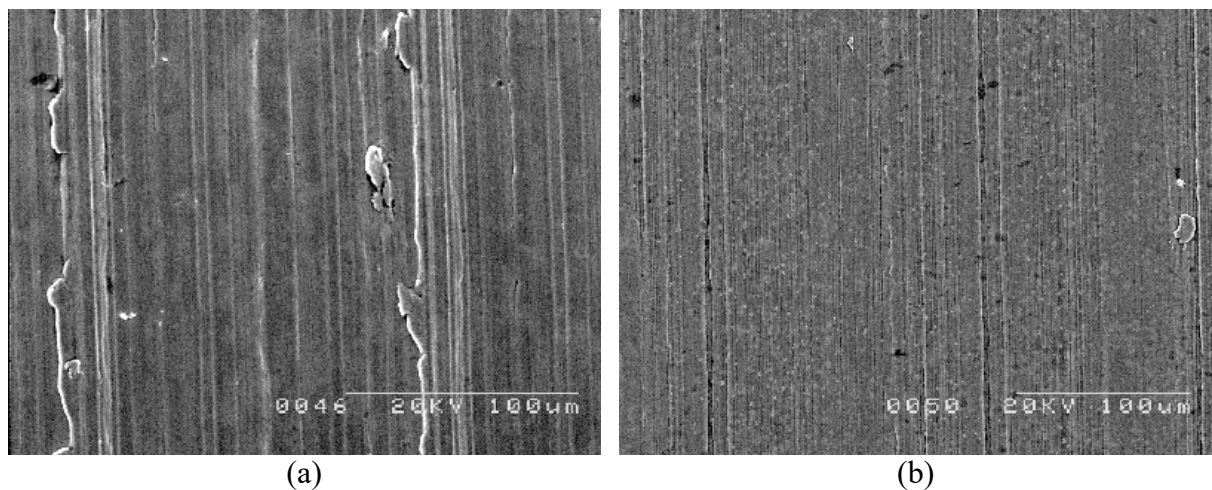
Surfaces generated after machining with PCD (T6) inserts with a coolant pressure of 11 MPa at a cutting speed of (a) 175 m min^{-1} and (b) 230 m min^{-1} .
